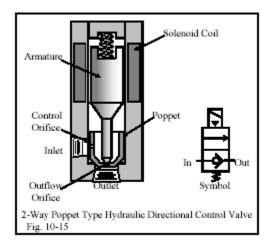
Poppet-type, 2-way hydraulic directional control valve
